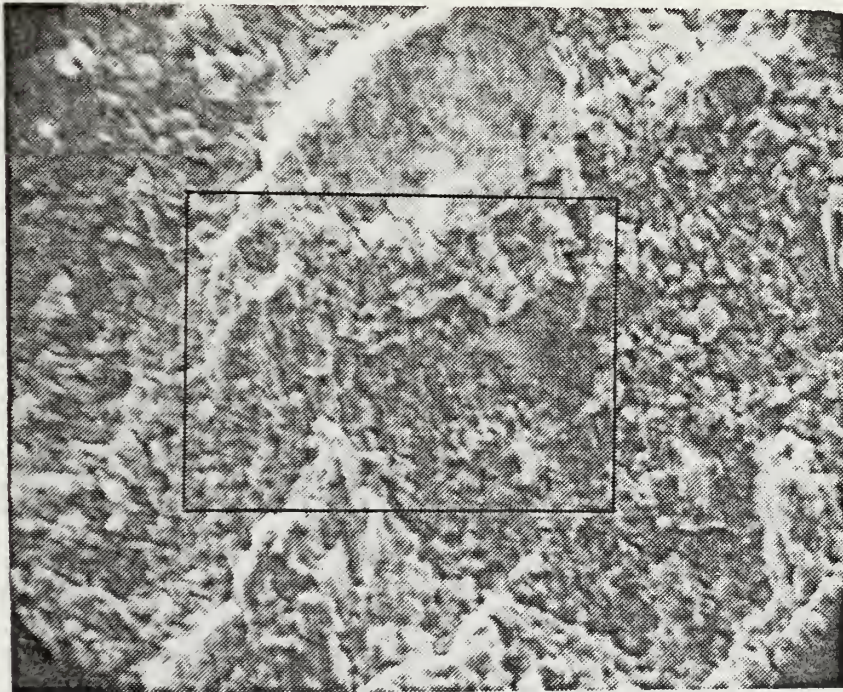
SEM fractograph of Fig. 30, in the fatigue zone, showing transgranular fracture and many secondary cracks. X1200.
